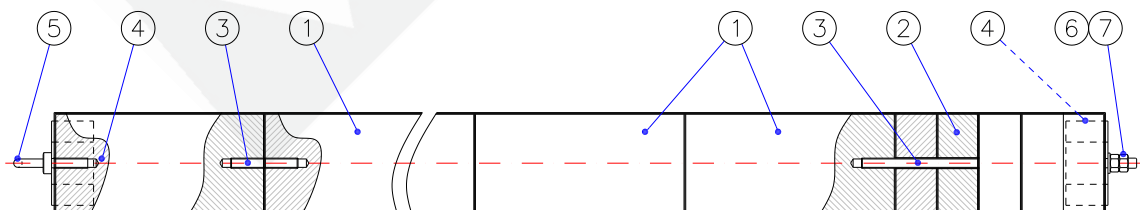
MARC-O120-01.05.00 [Balance weight assembly]
